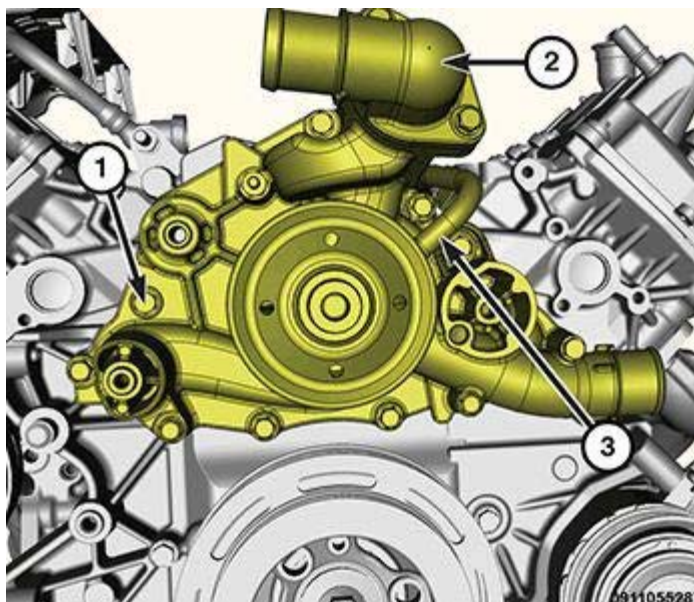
Water Pump Mounting Bolt & Thermostat Housing
